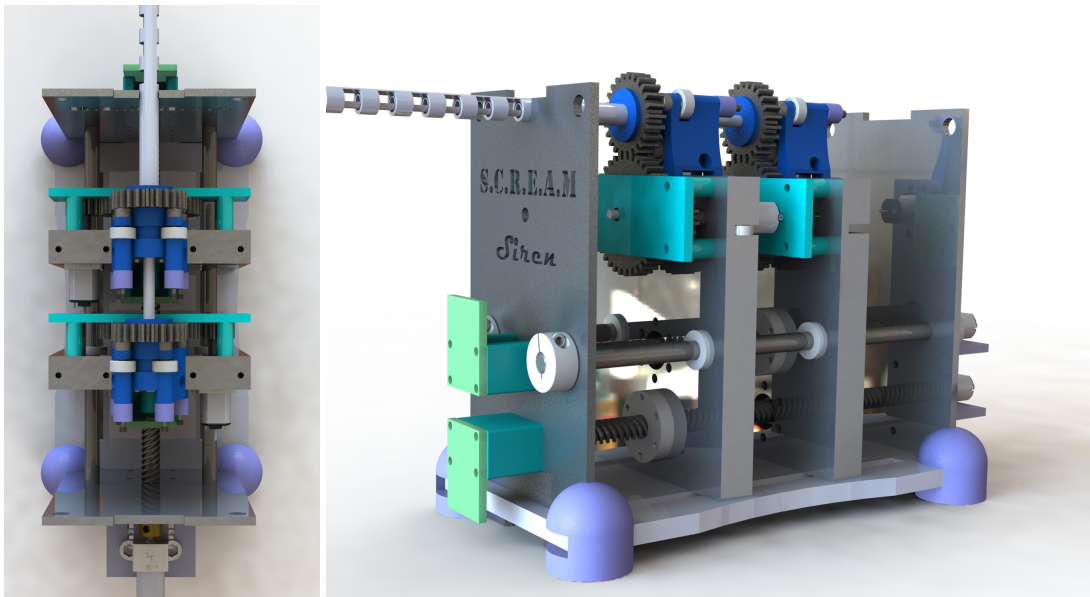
Top view (left) and isometric view (right) of the Siren robot.
